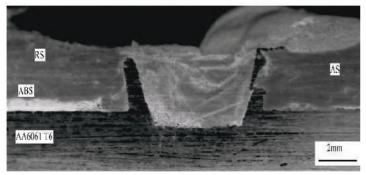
Cross sectional view of joint welded at 1000 rpm tool rotation, 14 mm/min feed rate and 20 mm shoulder diameter.
